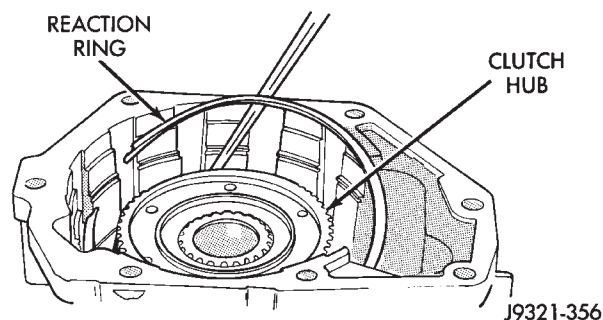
Overdrive Piston RemovalFig. 190 Removing Overdrive Clutch Pack Retaining RingFig. 191 Overdrive Clutch Pack Removal
